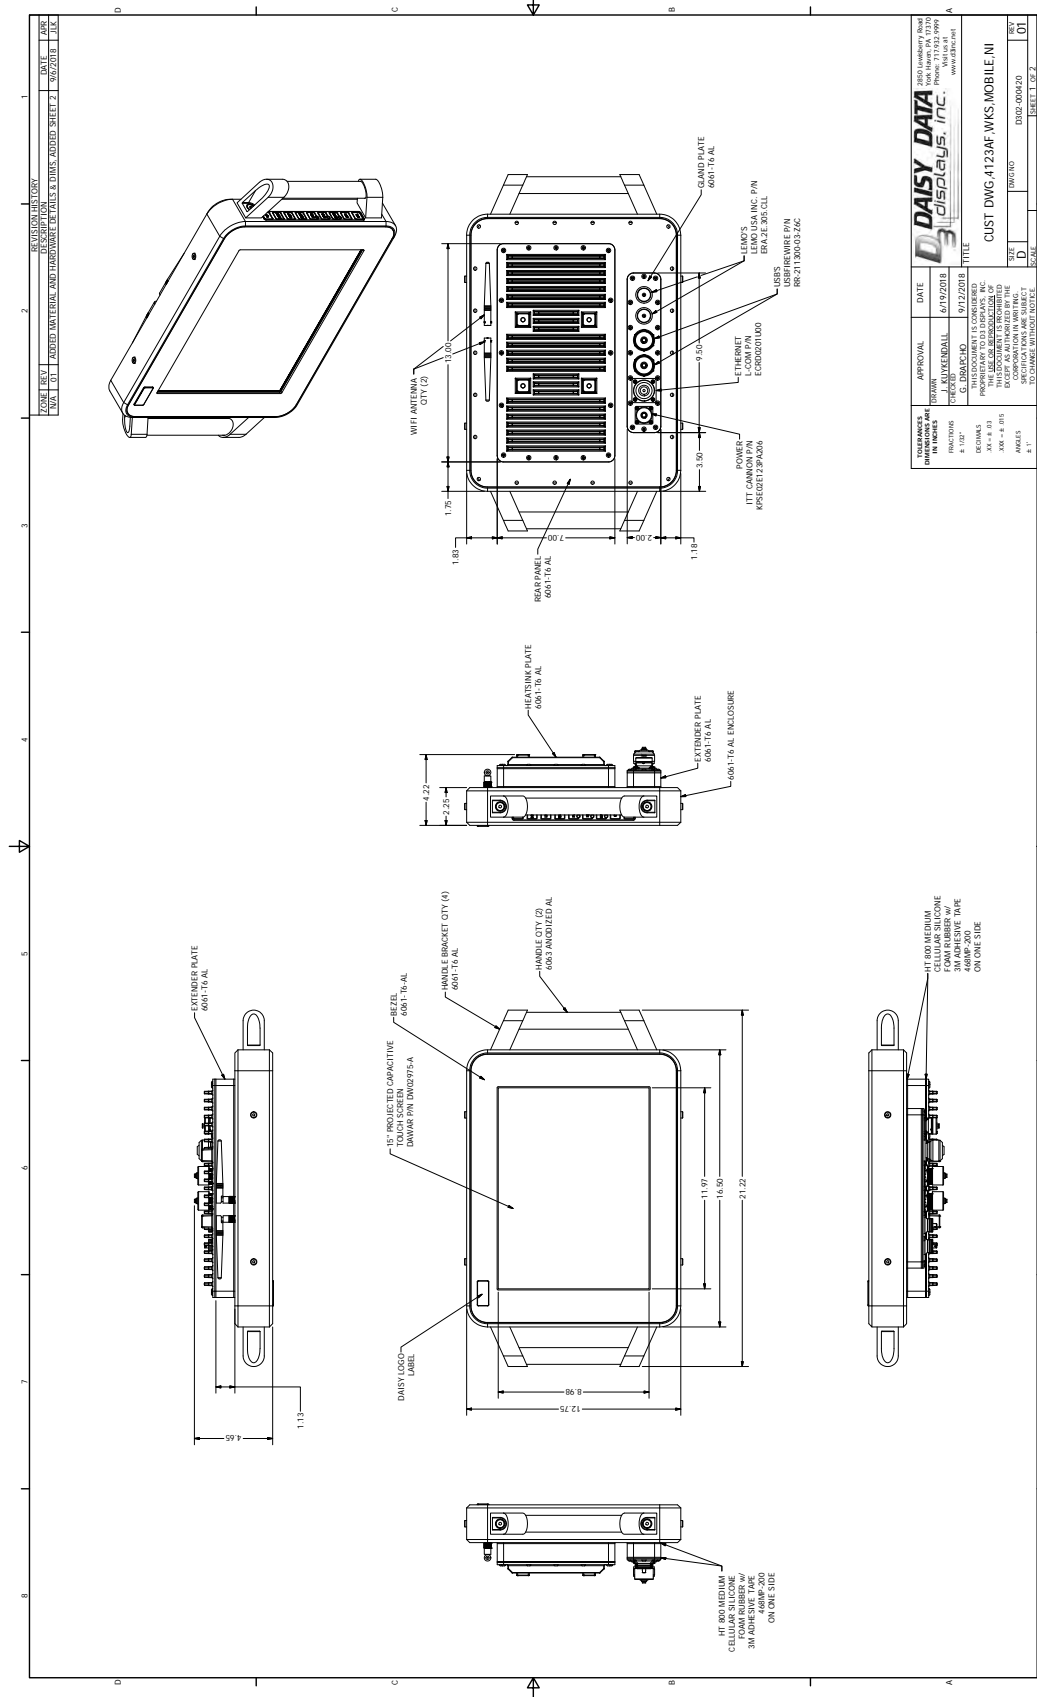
Model 4123AF Mechanical Drawing (1 of 2)
